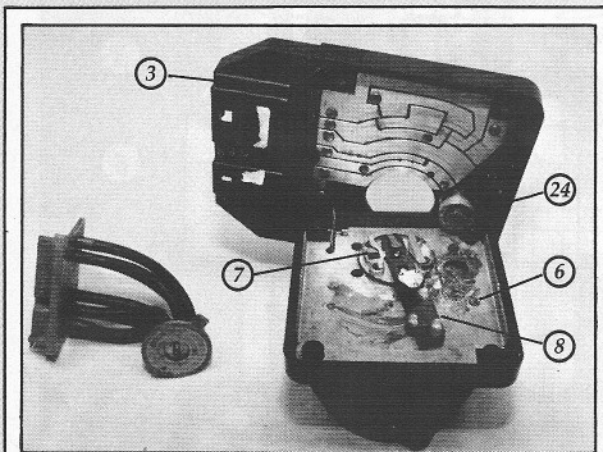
Blower Speed Switch: blower speed switch segments are in top plate (3); drive assembly (6); vacuum valve tension spring (7); blower speed switch arm (8) and feedback pot (24).
